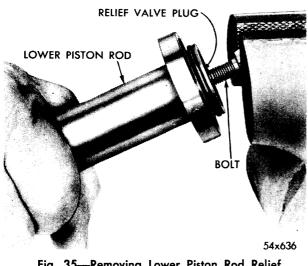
Removing Lower Piston Rod Relief Valve Plug
